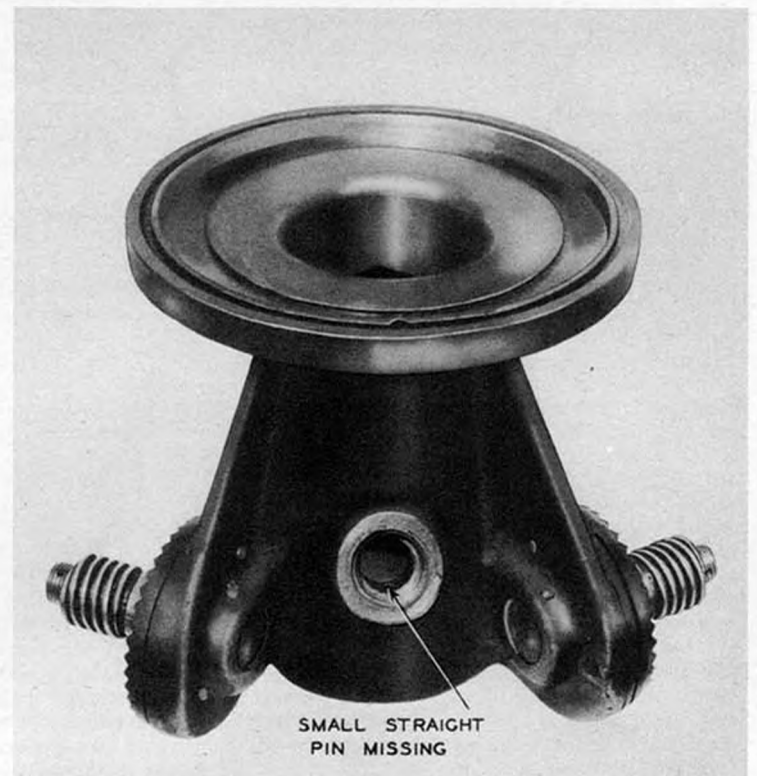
Showing pintle socket assembly with small straight pin missing. This allows the pintle clamping block to rotate when screwing or unscrewing the cradle pintle clamping screw into or from the socket, which condition in turn prevents proper engagement of the cradle pintle and makes it impossible to clamp the cradle pintle to a fixed position. If that small straight pin does not show in the socket use a small punch and hammer and drive it from the outside of the pintle socket inward until it protrudes about 1/8 inch. If it is missing replace with a new one. To find its recess on the socket remove the paint immediately below the cradle pintle clamping screw nut on the outside of the pintle socket.
